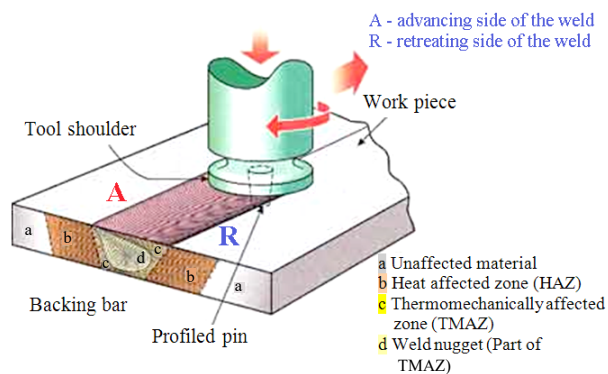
The FSW – tool movement and joint zones (www.twi.co.uk)
